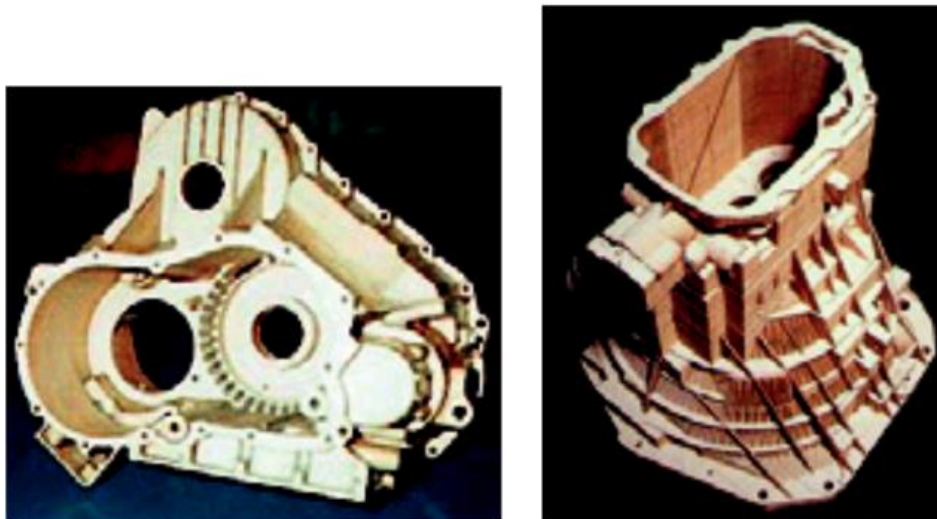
Layer laminate manufacturing, paper lamination; gear housing.
